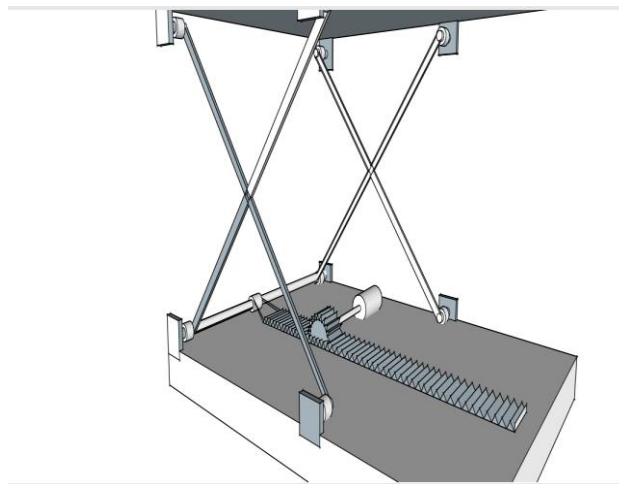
FIG: MODEL SHOWING SCISSORS LINKS AND GEARS
